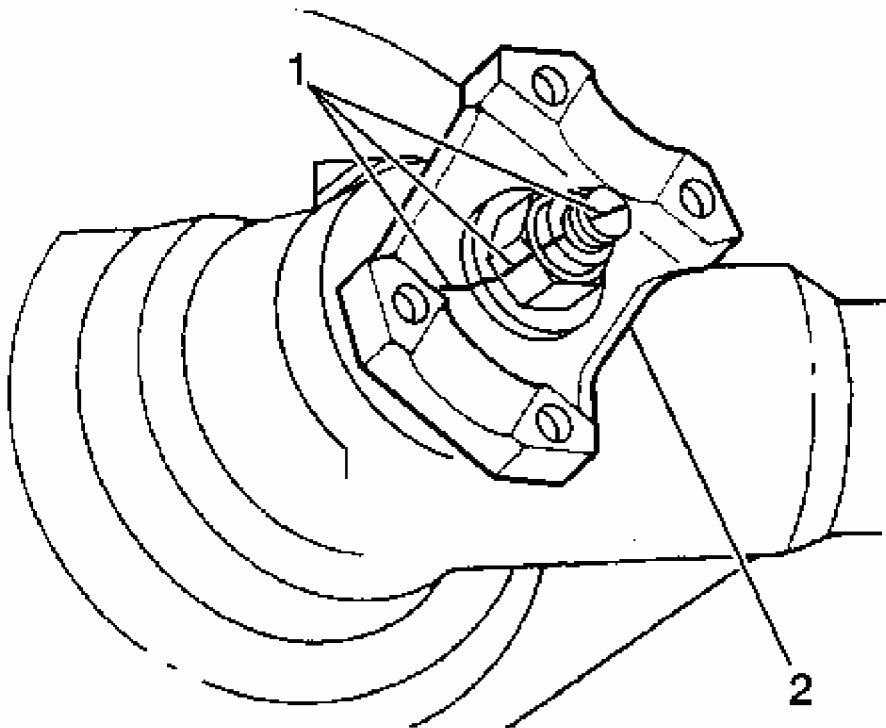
Locating Pinion Shaft & Pinion Yoke
